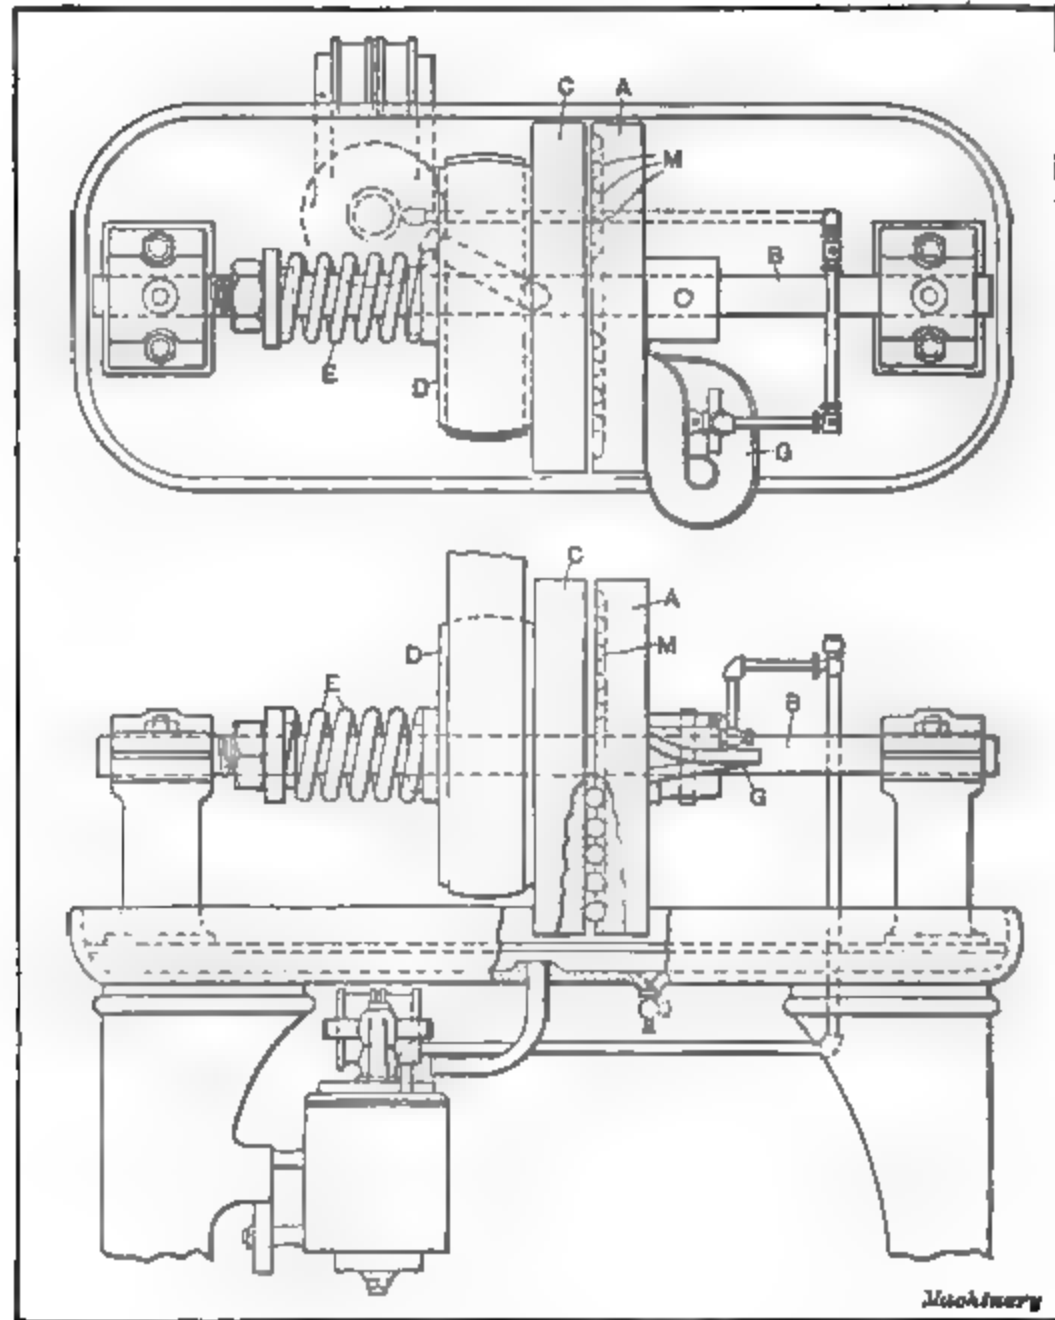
Improved Hoffmann Ball Grinding Machine—U. S. Patent No. 863,926
